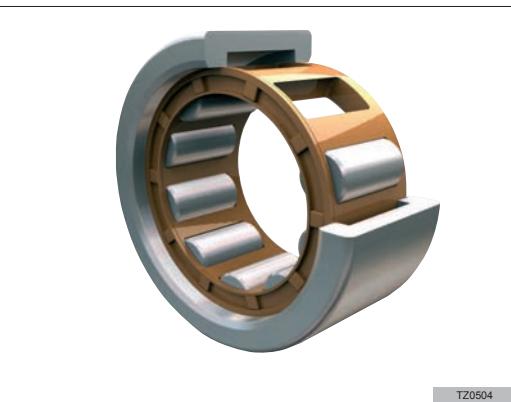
Single-row cylindrical roller bearing of RNU type, without an inner ring
